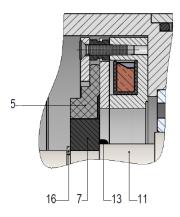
/2: Feather key assembly of hub (7) and machine shaft (e.g. motor shaft) (11)
